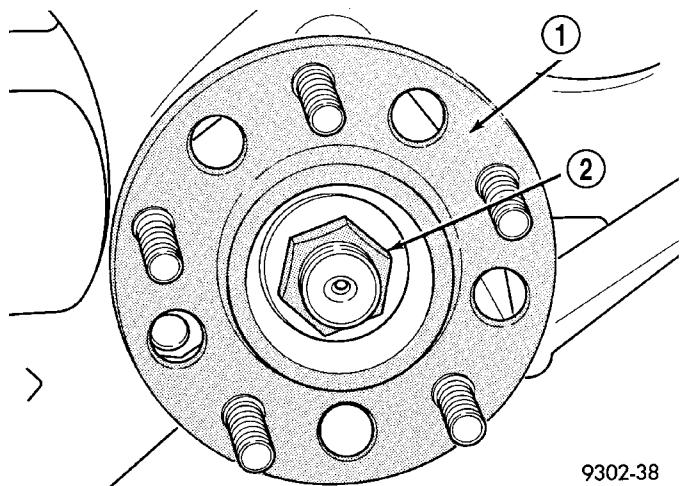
Hub And Bearing To Stub Axle Retaining Nut
